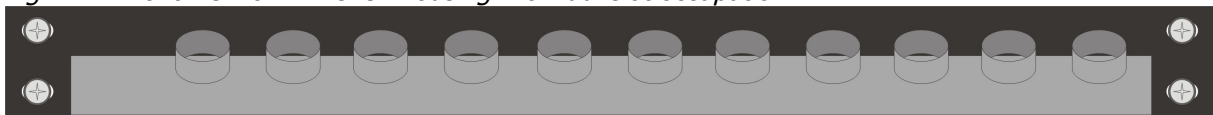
Cable fixing shelf – MAC.PMK
